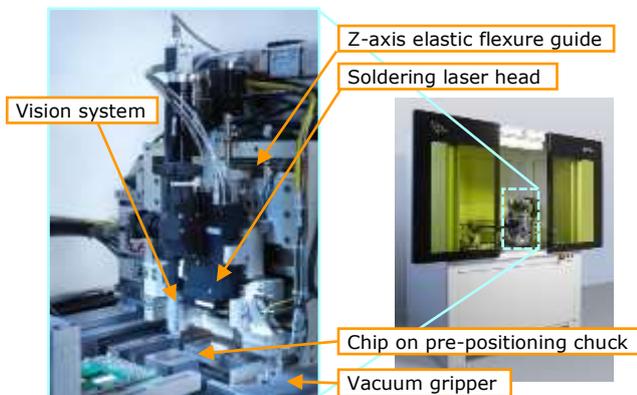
Assembly machine and close-up of Z-axis with critical modules
